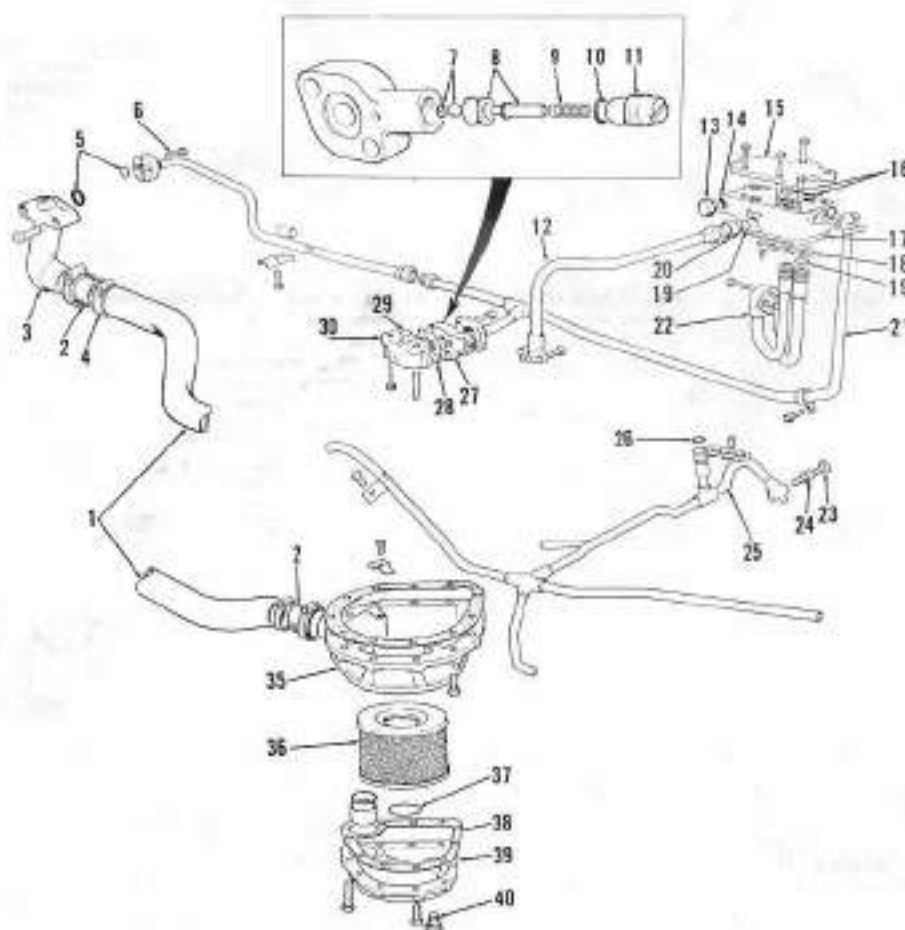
Exploded view of hydraulic lines and filters for models with single hydraulic pump.
